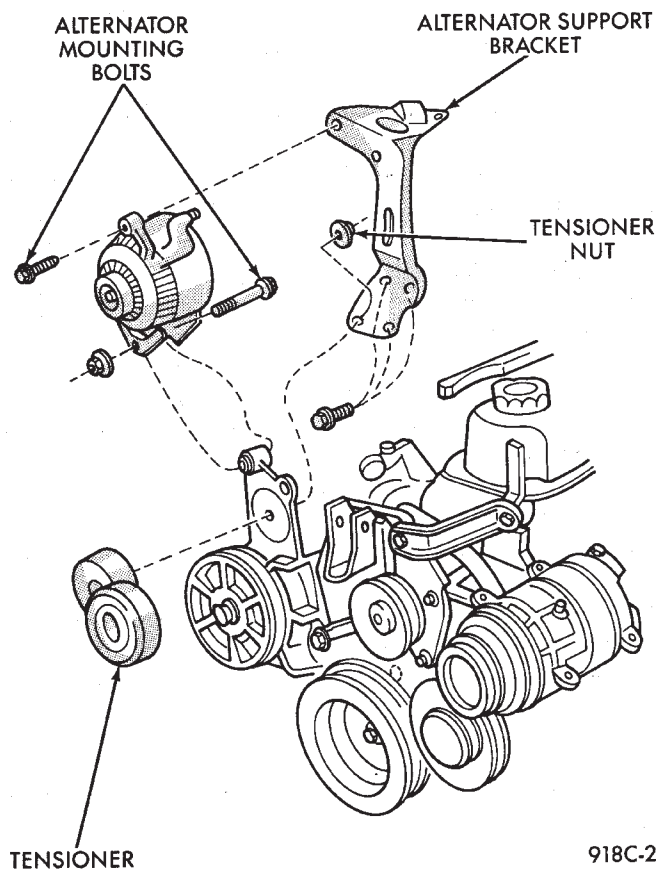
Remove or Install Alternator Mounting Bolts—3.0L Engine
